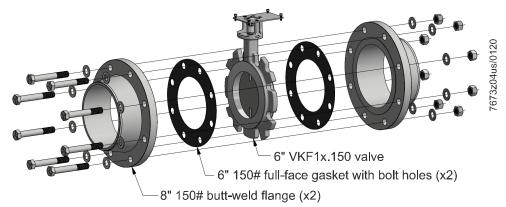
Mounting a 6" VKF1x.150 Valve in a Reduced Port Application
